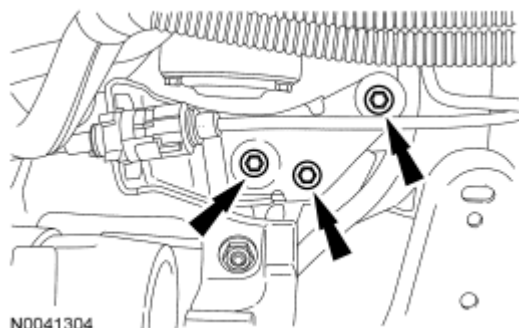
Identifying Transmission Control Module Electrical Connector
